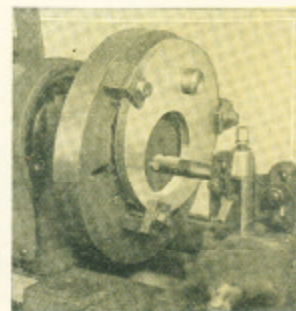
Boring an Eccentric on an 18-inch Lathe.
